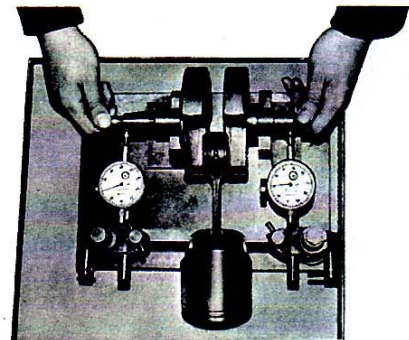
Inspection crankshaft deflection
